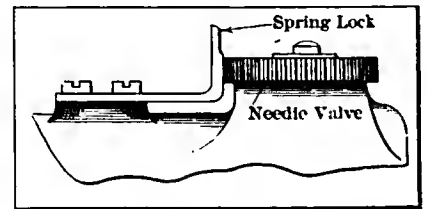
A troublesome lock for a needle valve on a carbureter
